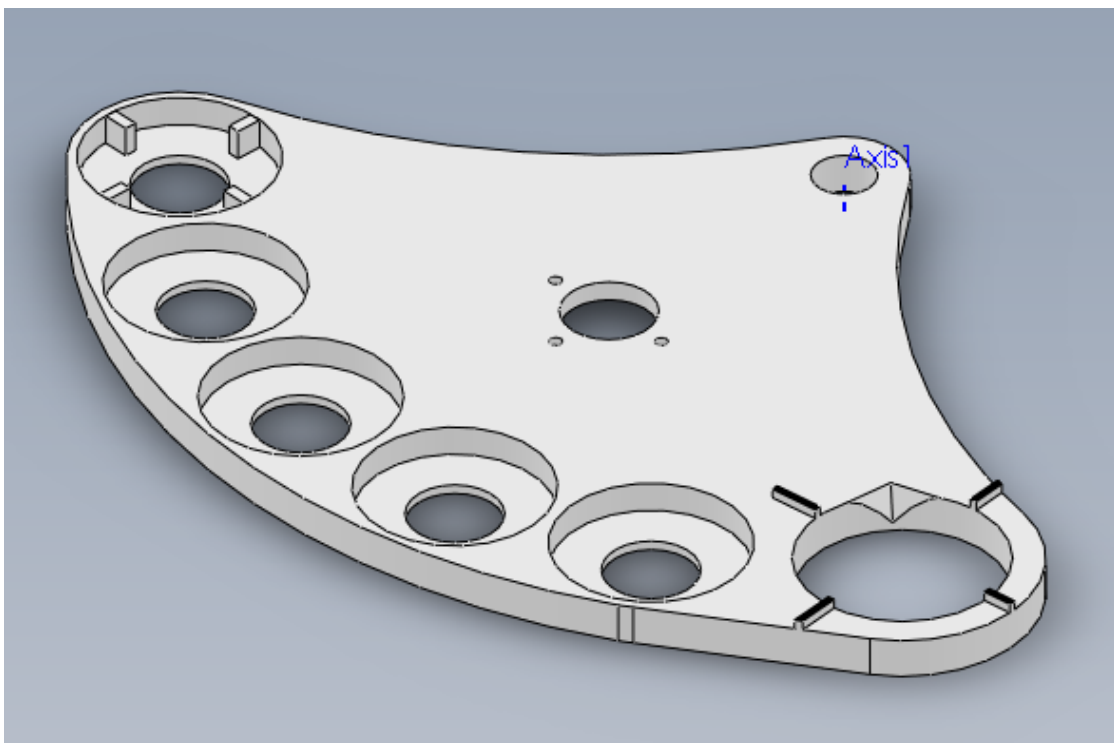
Hinge Surface for Specimen Handling Assembly
